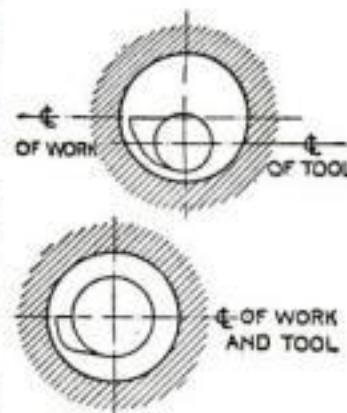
Boring tool wrongly held (above) and rightly held (below)
